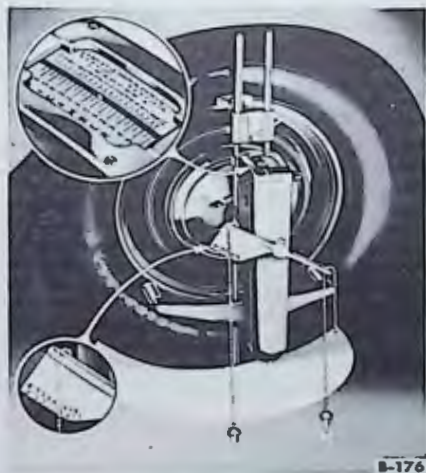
Wheel in Straight Ahead Position, Checking Caster
